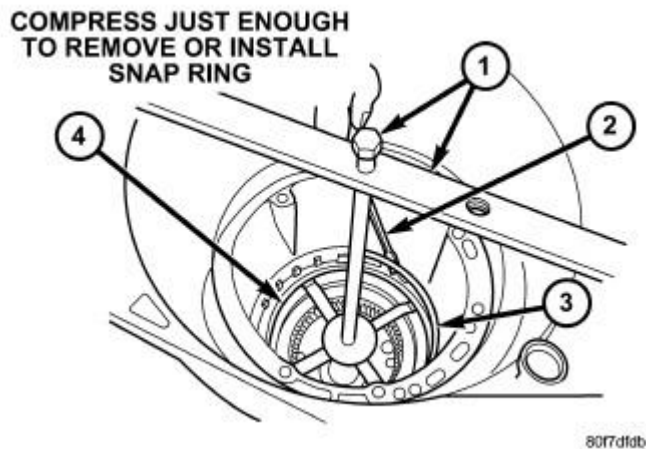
Remove/Install 2/4 Clutch Retainer Snap Ring
